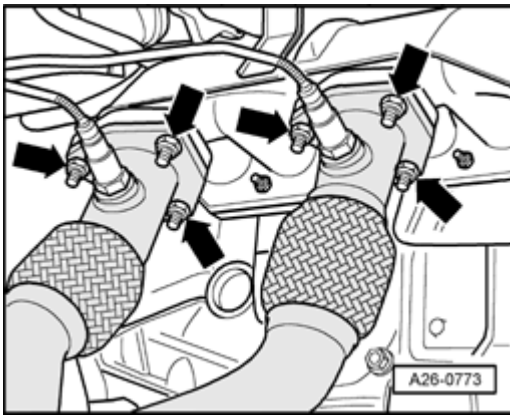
Unbolting Front Exhaust Pipe At Exhaust Manifold
